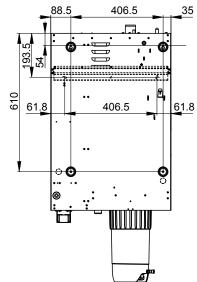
Unit dimensions unit "S" (dimensions in mm)
